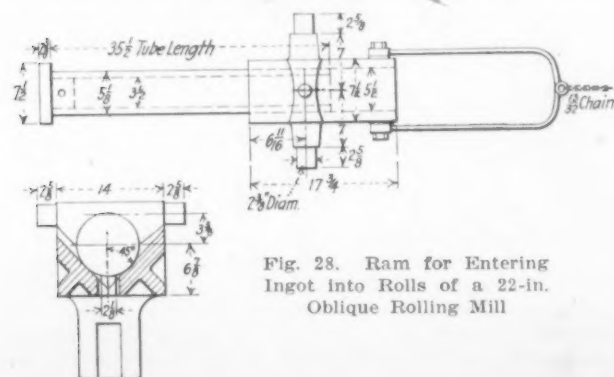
Ram for Entering Ingot into Rolls of a 22-in. Oblique Rolling Mill
